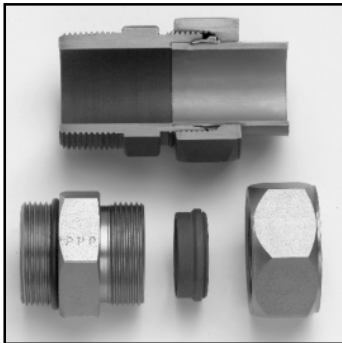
Ferulok components (fitting body, sleeve and nut), and Ferulok fitting cutaway
